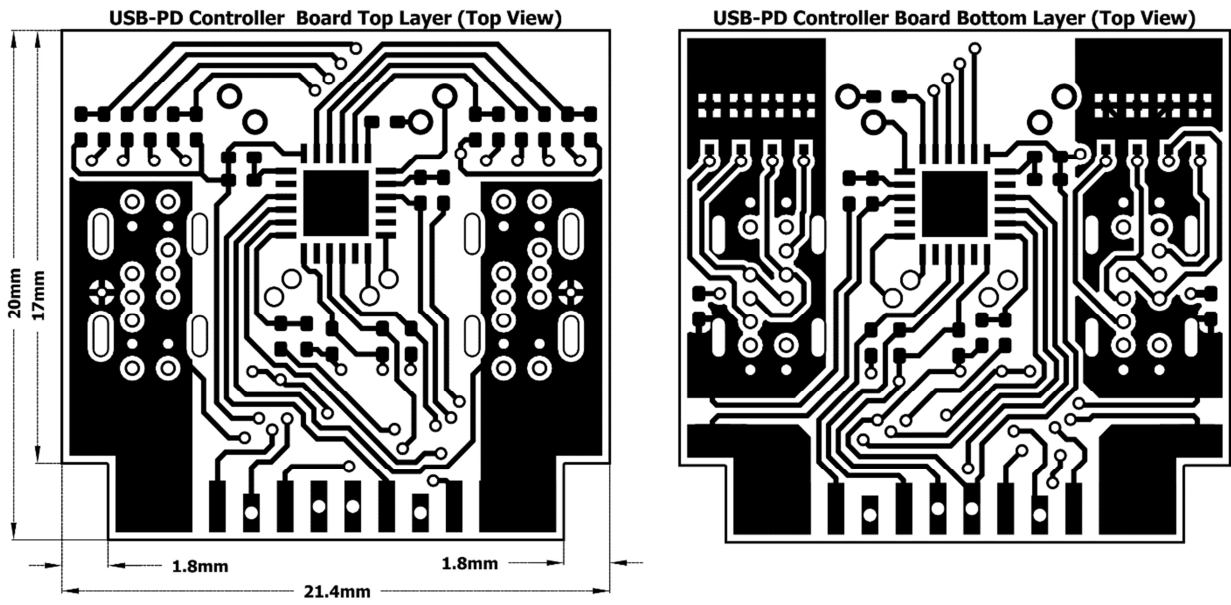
DER-916 USB PD Controller Board Rev C Printed Circuit Layout.
